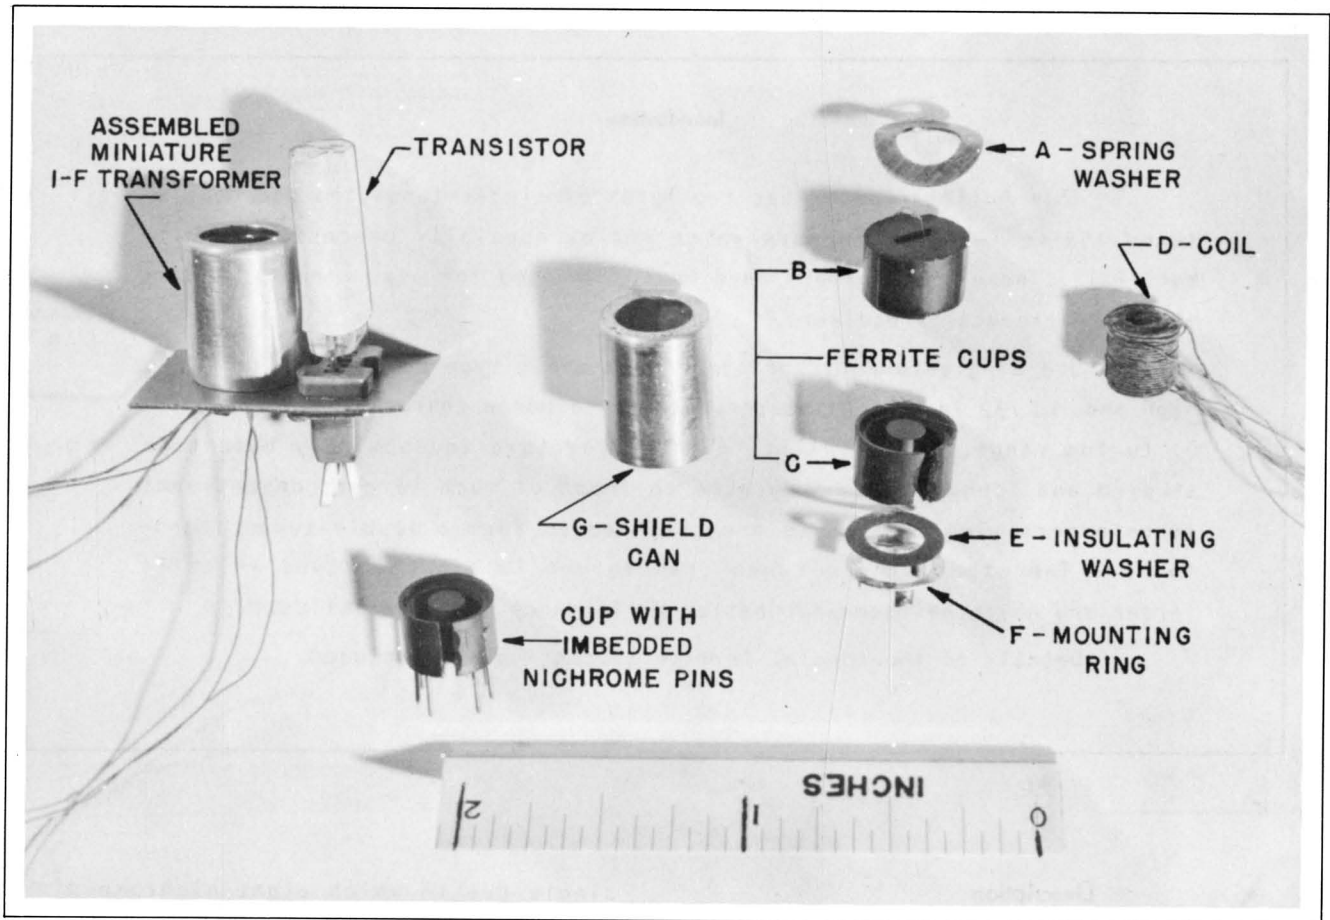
Assembled and exploded views of miniature i-f transformer.
